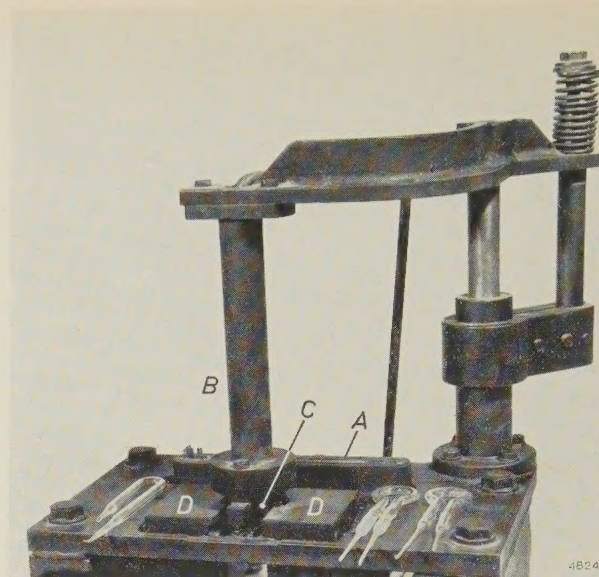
Simple machine for shaping the envelopes of discharge tubes, in this case Ω -shaped. A burner for heating the glass tube. B pipe, through the base of which a mandrel projects for pre-shaping the glass tube. C mould into which the tube, bent into a U shape, is introduced. D mould halves for final shaping.
